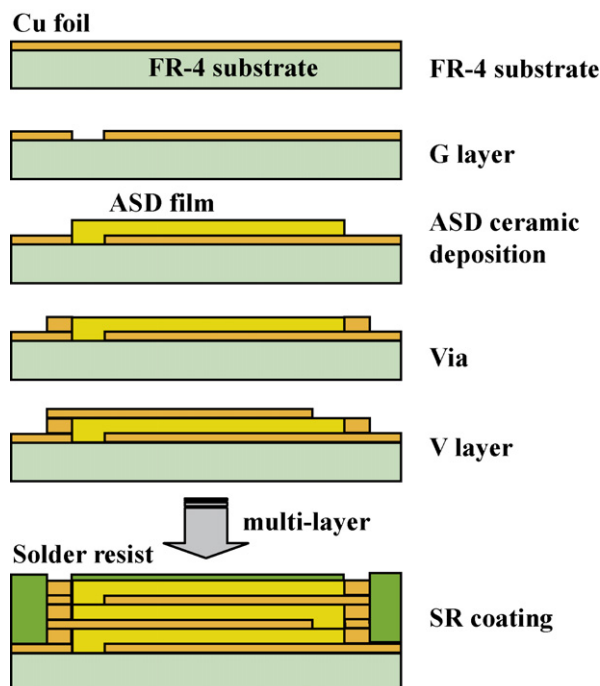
Manufacturing process for prototype of multi-layer capacitor on FR-4.
